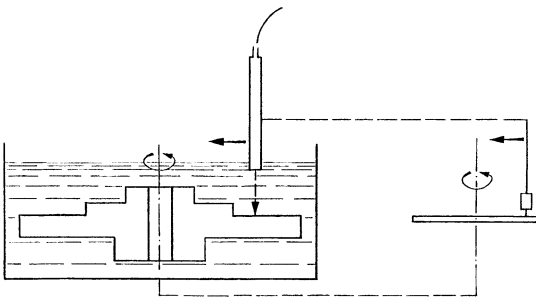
Checking blanks of turbine discs by the immersion technique with circular recorder, schematic
